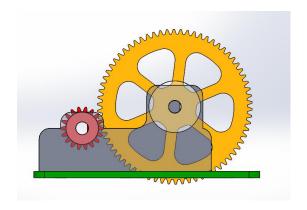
Side view of the gearbox showing the drive gear protruding through the gearbox base.
